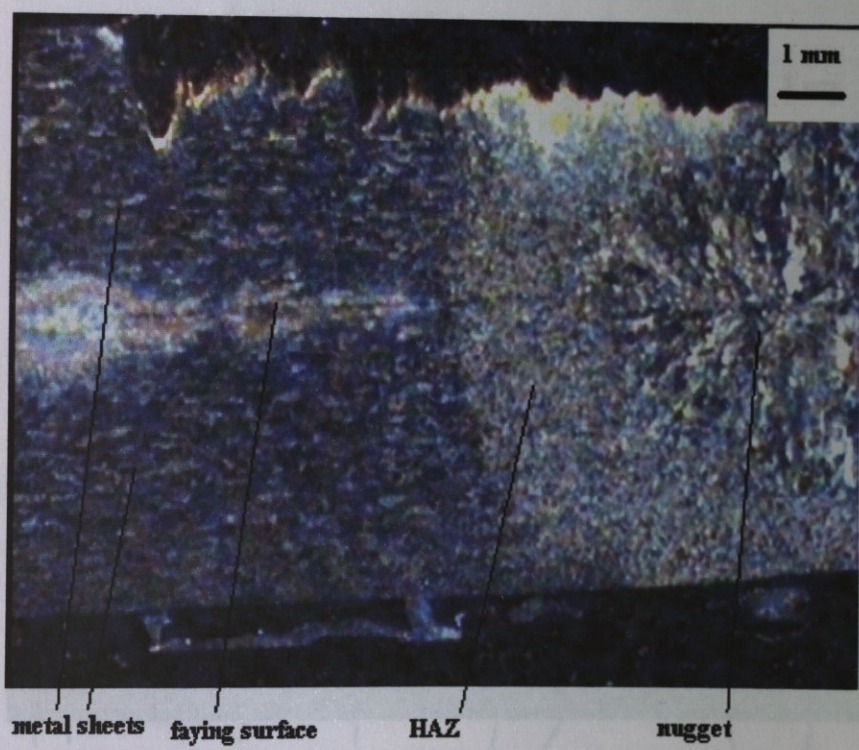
Manual spot-welded MTS specimen (focused at one edge)
